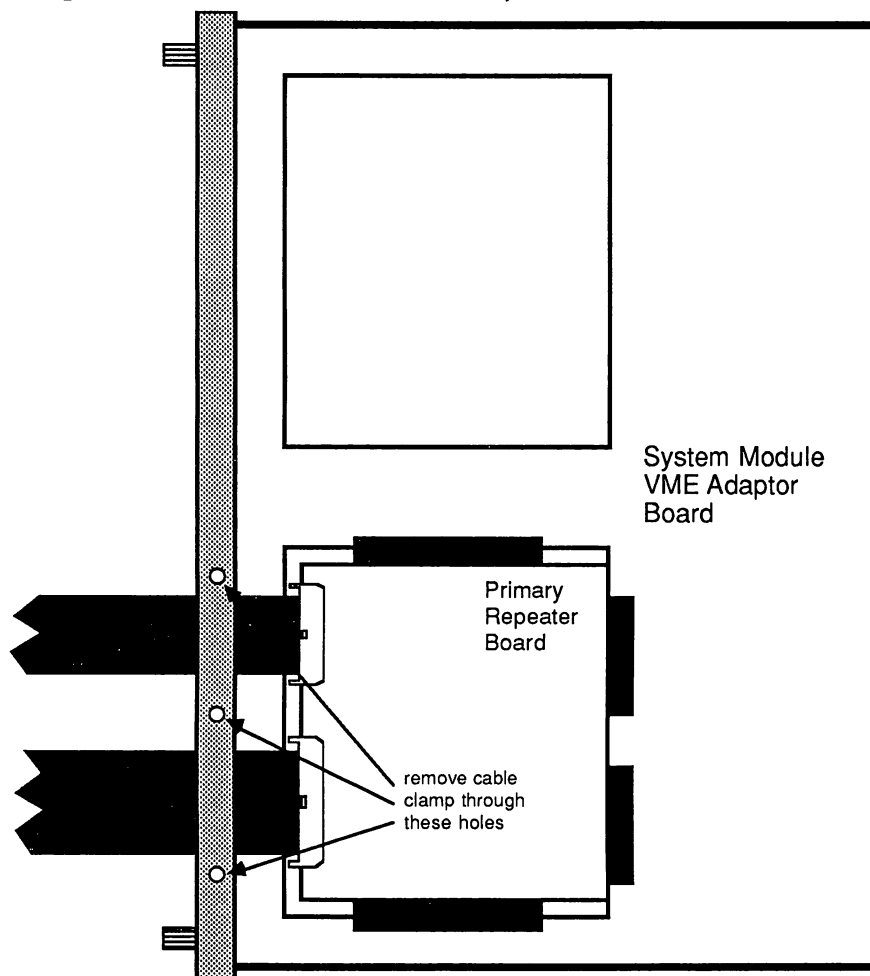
Removing the Repeater cables from the VME Adaptor Board
